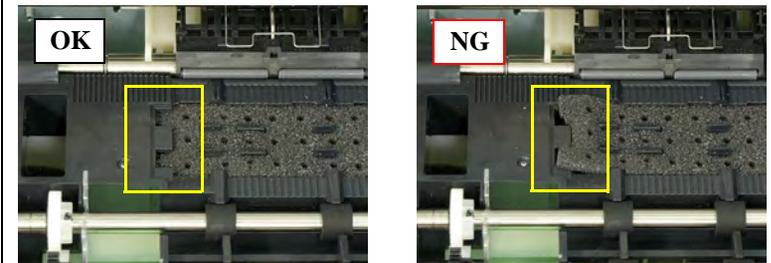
Reinstalling the Front Paper Guide Pad (2)
